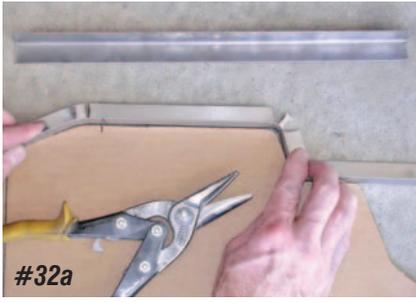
& 32b: The portion of the cheek template that was cut away and saved became a trunk floor contour guide for making a flange. The flange will help strengthen the joint between the floor
